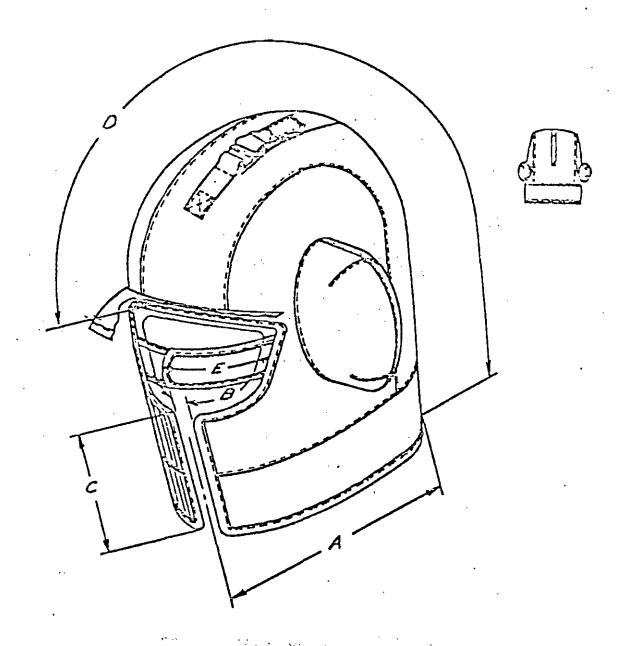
HOOD, EXTREME COLD WEATHER, IMPERMEABLE (TYPE I)
